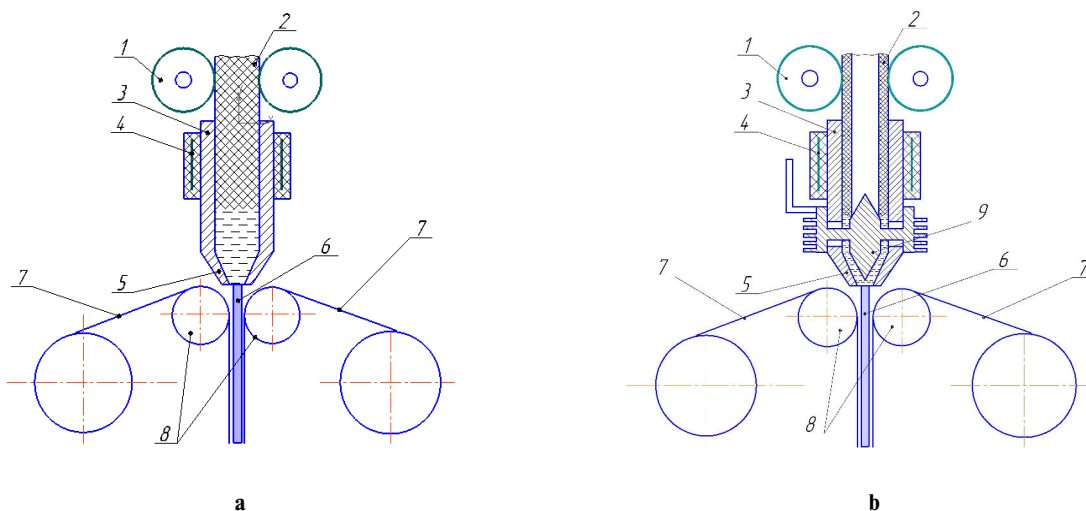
The schemes of the device of welding with melt: (a) traditional, (b) developed in this work. 1 – feeding mechanism; 2 – polymer rod; 3 – the channel for melting of a polymeric rod; 4 – heating block; 5 – nozzle; 6 – polymer melt; 7 – rolls of the connected material; 8 – clamping rollers; 9 – mandrel
